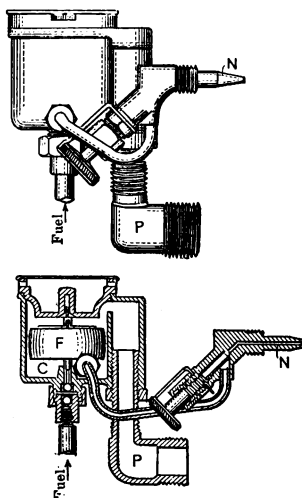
Fuel-feeding Mechanism, Gaso-Kero Engine.
